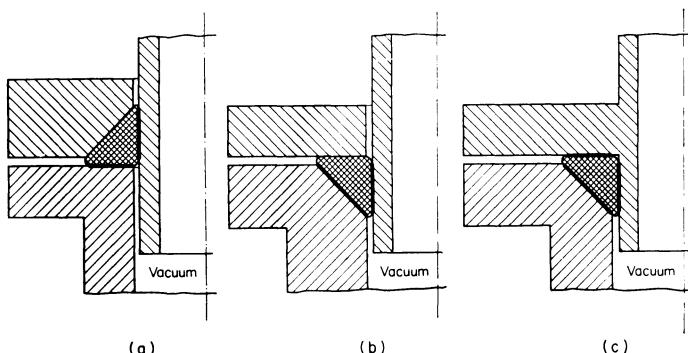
Basic arrangements for conical O-ring seals: (a, b) seals consisting of three parts; (a) conical washer on atmospheric side; (b) conically shaped flange on vacuum side; (c) seal consisting of two parts with conically shaped flange on vacuum side
